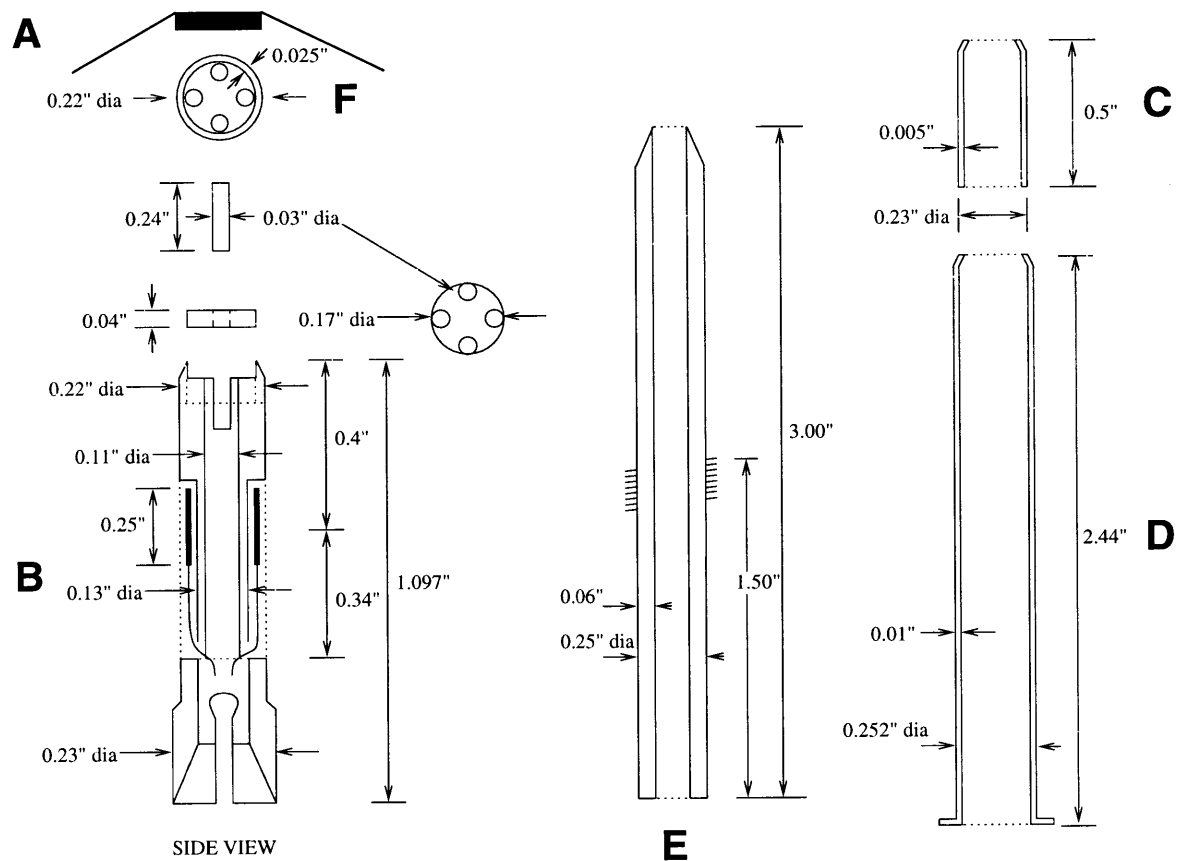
Dimensioned drawing of the components of the HHV5.0 probe: (A) the ETS, (B) inner core, (C) torlon sheath, (D) stainless steel tube, (E) screwed pusher/plunger, and (F) recess for backing plate in the inner core [Courtesy E. Quan [187]].
